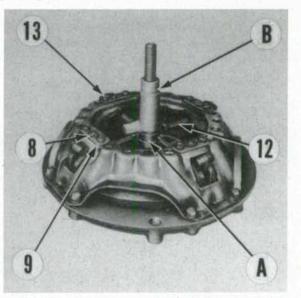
Use gage spacer (A) and lever gage (B) on clutch fixture tool as shown to adjust release lever height. Refer to text.
